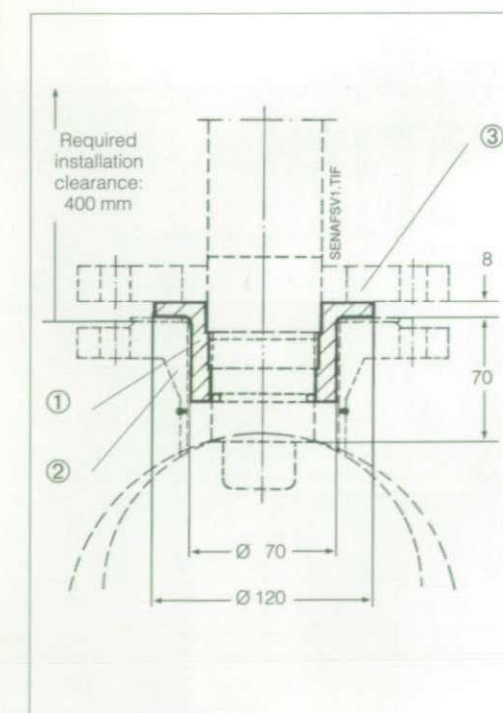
AFS-V adapter, stainless steel (1.457) for flange mounting of Sensopac CPA 320
